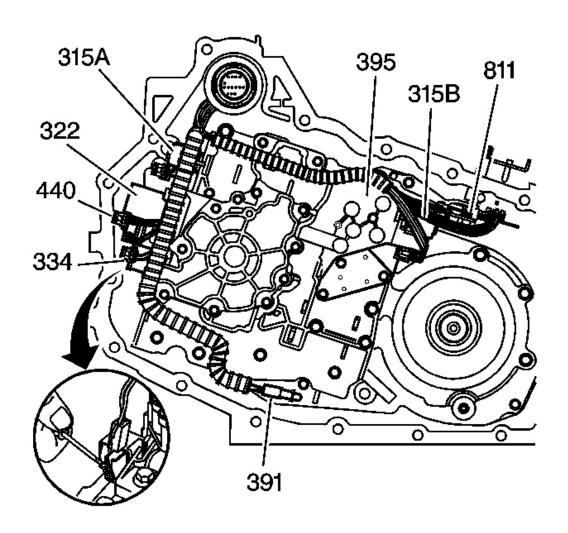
View Of Control Valve Body Cover Bolts Courtesy of GENERAL MOTORS CORP.
